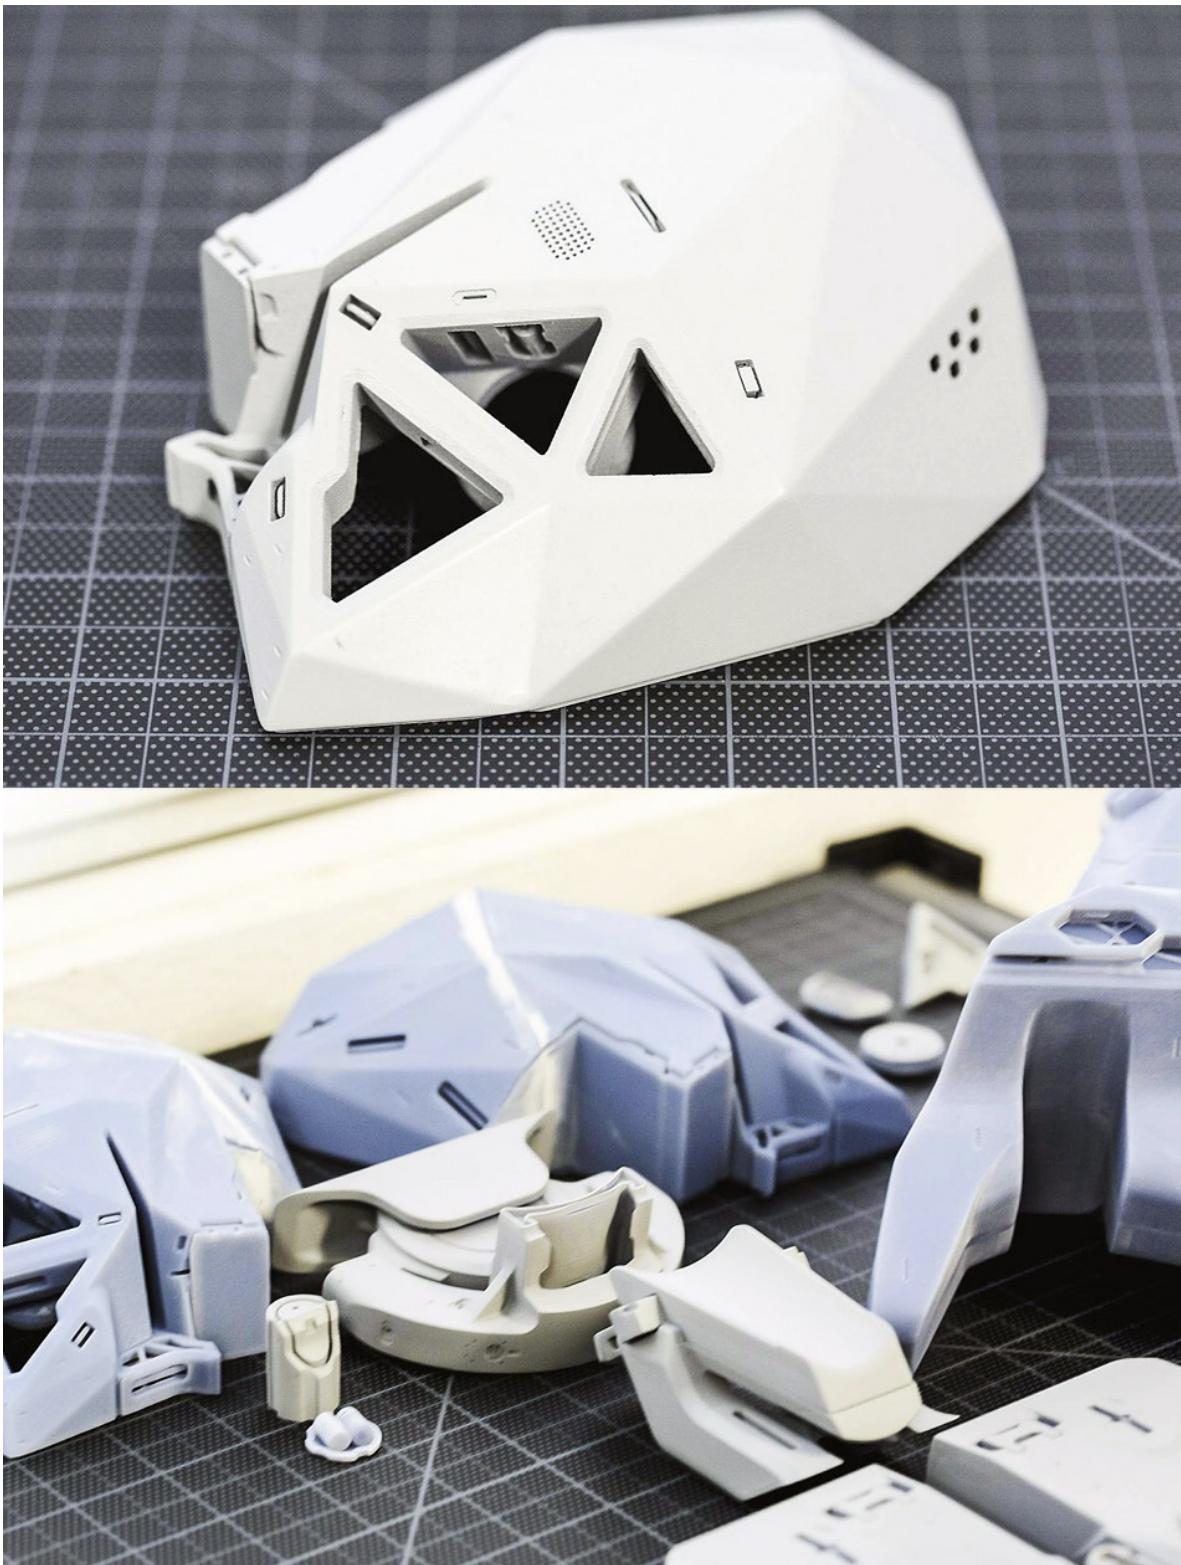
A piece of the Ultraborg model showing the smooth surface and detail produced by Material Jetting (top). Parts during post processing (bottom). Images courtesy of Factor 31
